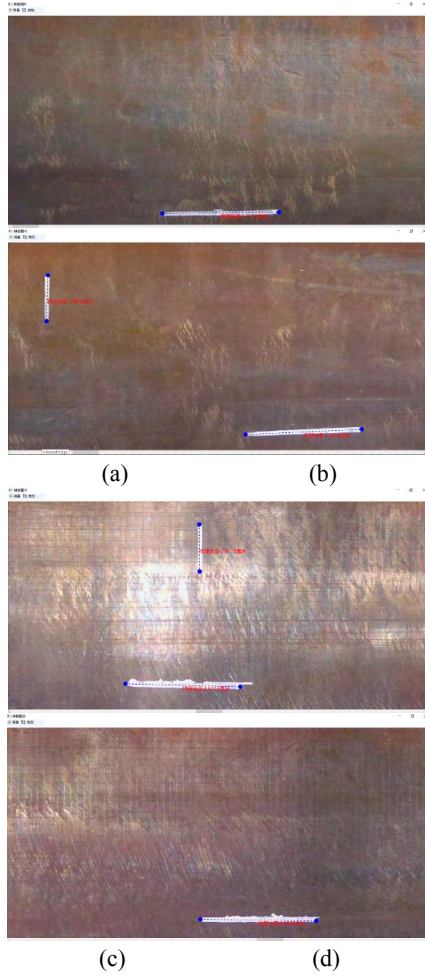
Defect analysis from visual inspection of the inner radial surface of the mock-up RPV nozzle (Units: cm)
